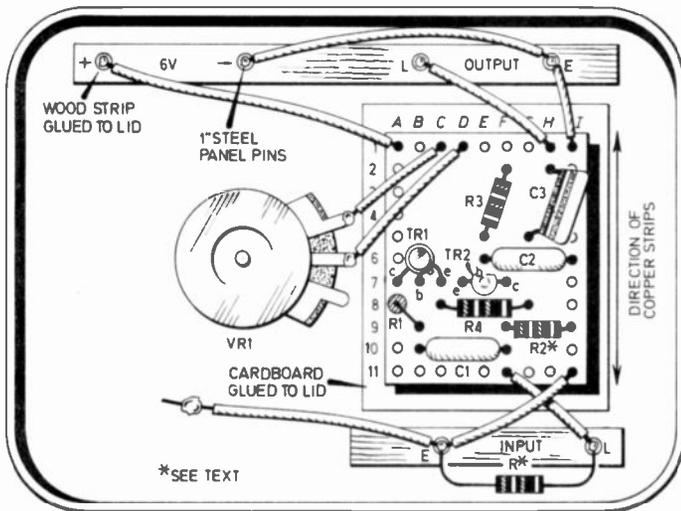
Assembly of the universal oscillator components upon the lid of a tobacco tin. Note that wire from "input E" pin is soldered to case.
